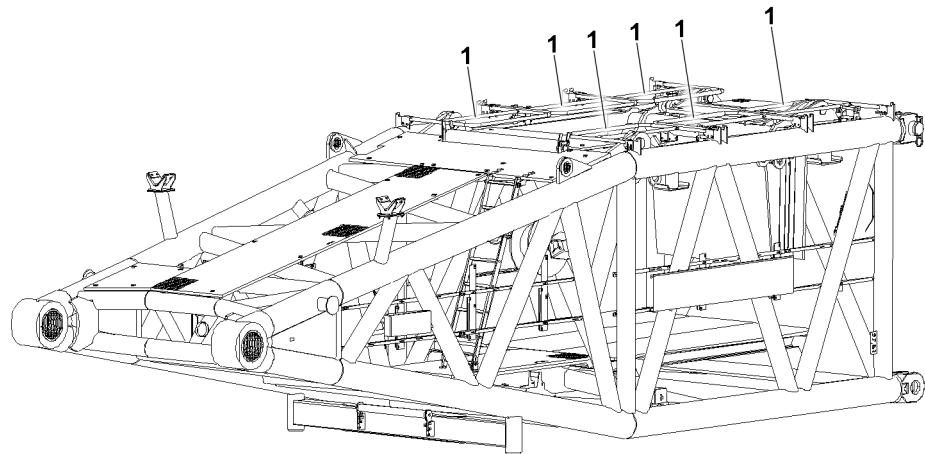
Fall protection equipment on the boom pivot sections and on the lattice sections — prerequisites
